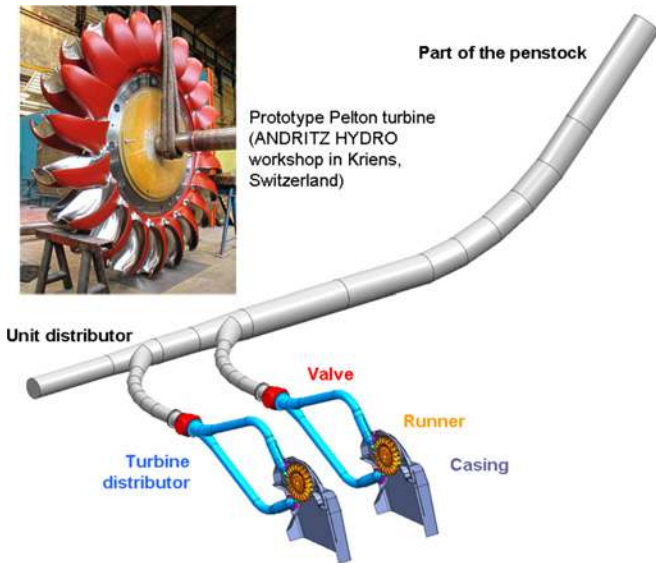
Typical layout of 2 units of 2-jet Pelton turbine (penstock, “unit” distributor, turbine distributor, runner and casing)
